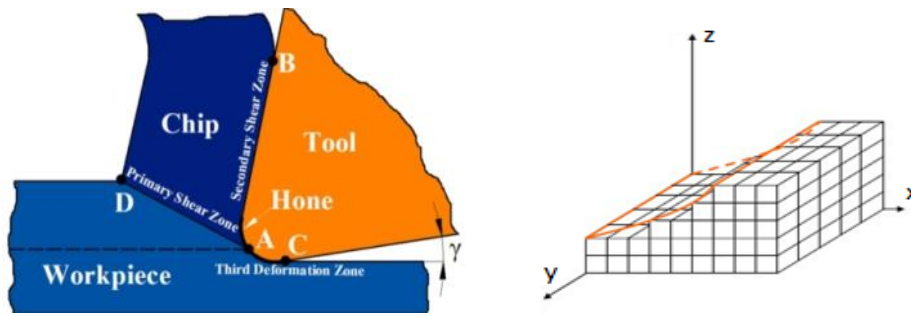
(a) orthogonal cutting schematic (b) scanning the contact zone between wheel and workpiece
